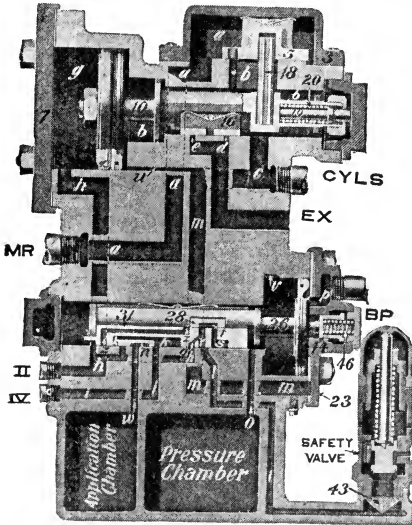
,989.—*Emergency.* When a sudden and heavy brake pipe reduction is made, as in an emergency application, the air pressure in the pressure chamber forces equalizing piston 26, to the right with sufficient force to compress equalizing spring 46, and to seat against the leather gasket beneath cap 23. This movement causes equalizing valve 31, to uncover port *h* in the seat without opening port *w*, making a direct opening from the pressure chamber to the application cylinder only, so that they quickly become equalized. This cylinder volume, being small, and connected with that of the pressure chamber at 70 pounds pressure, equalizes at about 65 pounds. Also in this position of the automatic brake valve, a small port in the rotary valve allows air from the main reservoirs to feed into the application cylinder pipe, and thus to the application chamber. The application cylinder is now connected to the safety valve through port *h*, in the seat, cavity *q*, and port *r*, in the equalizing valve, and port *l*, in the seat. Cavity *q*, and port *r*, in the equalizing valve are connected by a small port, the size of which permits the air in the application cylinder to escape through the safety valve at the same rate that the air from the main reservoirs, feeding through the rotary valve of the automatic brake valve, can supply it, preventing the pressure rising above the adjustment of the safety valve. In high speed brake service the feed valve is regulated for 110 pounds brake pipe pressure instead of 70, and main, reservoir pressure is 130 or 140 pounds. Under these conditions an emergency application raises the application cylinder pressure to about 93 pounds, but the passage between cavity *q*, and port *r*, is so small that the flow of application cylinder pressure to the safety valve is just enough greater than the supply through the brake valve, to decrease that pressure in practically the same time and manner as is done by the high speed reducing valve, until it is approximately 75 pounds. The reason why the pressure in the application cylinder pressure chamber and brake cylinders does not fall to 68 pounds to which pressure the safety valve is adjusted, is because the inflow of air through the brake valve with the high main reservoir pressure used in high speed service is equal, at 75 pounds, to the outflow through the small opening to the safety valve. This is done to get a shorter stop in emergency. The application portion of the distributing valve operates similarly, but more quickly than in service application.
